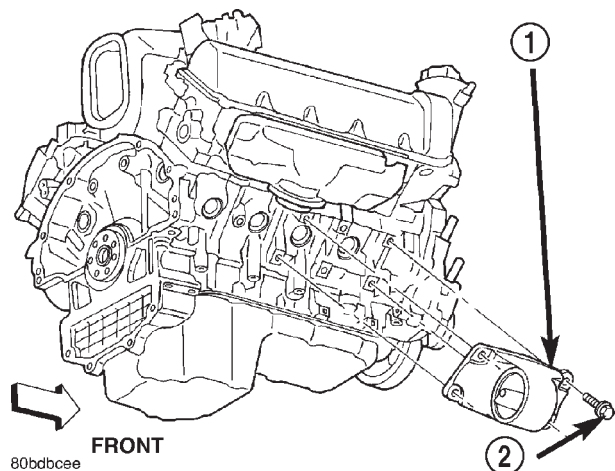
Engine Insulator Mount 4x2 Vehicle—Right Side
